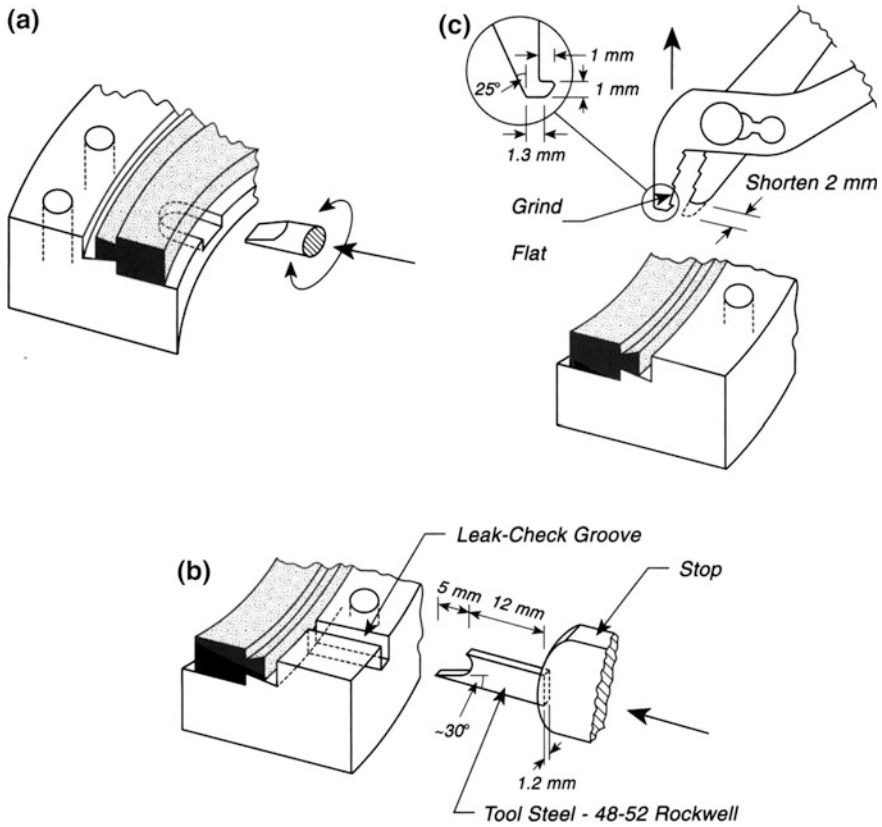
Tools for copper gasket removal. a Inside slot design. b Leak-check groove tool. c Custom pliers
